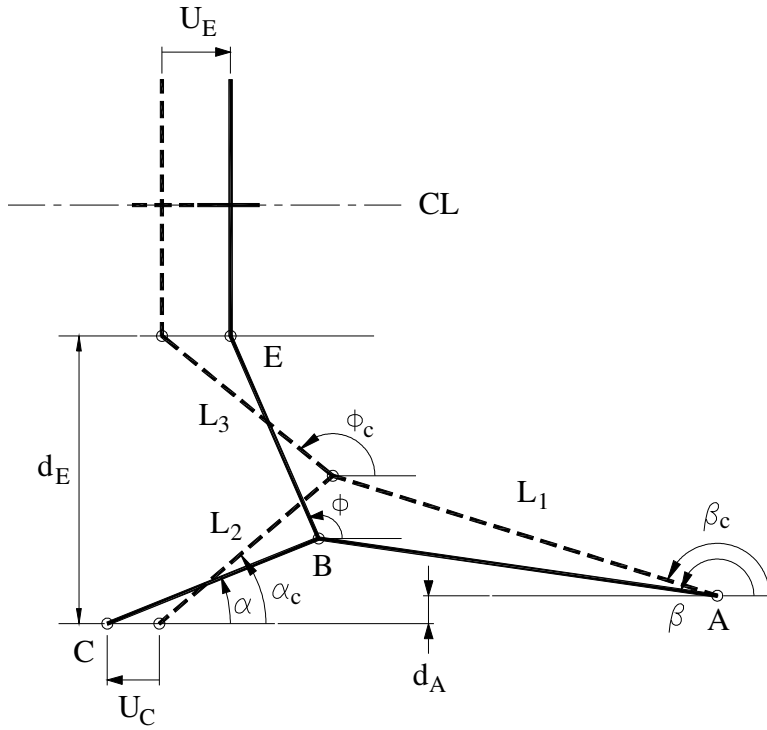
Geometry of the toggle linkage during the real-mould clamping
